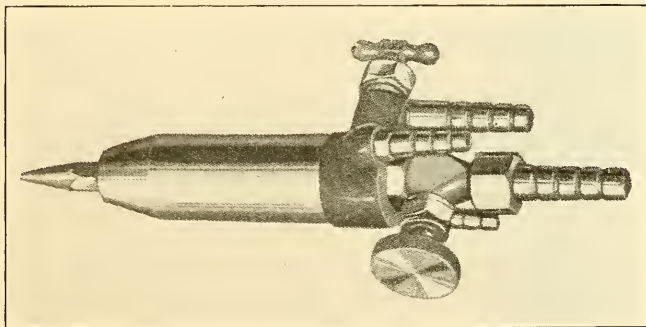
The Oxweld Water-Cooled Single-Jet Welding Torch, Type W-8.
